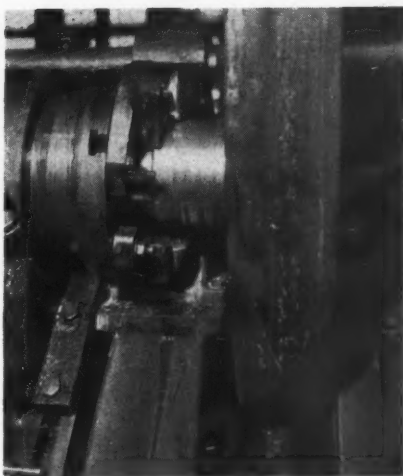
Crankpins Are Turned and Burnished in the Quartering Machine
